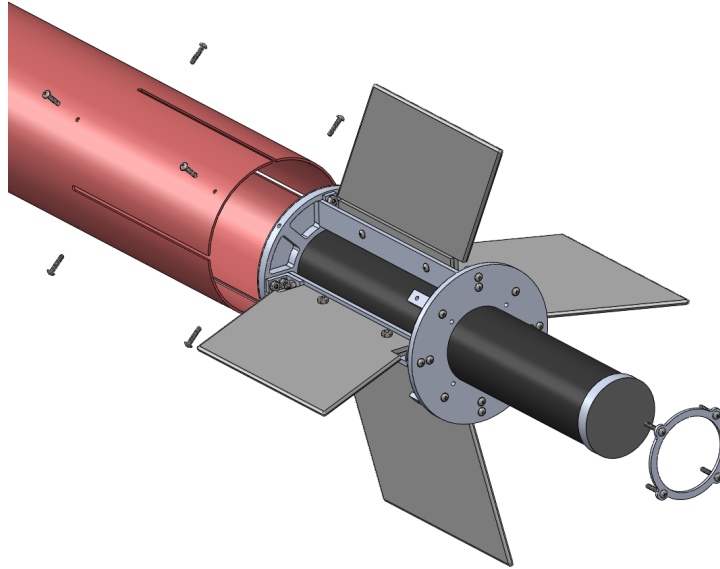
Exploded view of Fin Can with RMFS, motor casing, and motor retainer.
